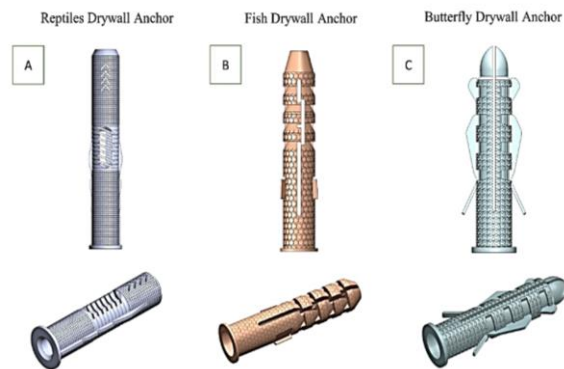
Our 3D-printed drywall anchor design, a) Reptiles drywall, b) Fish drywall, c) Butterfly drywall.
